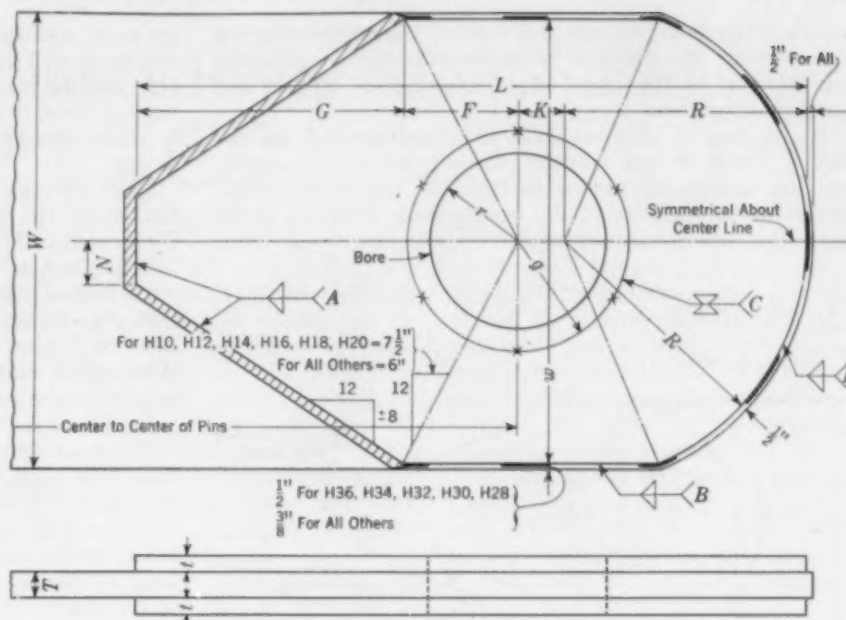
WELDED HEAD FOR PLATE EYEBAR
